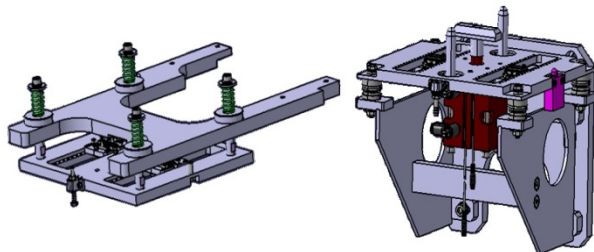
CAD drawings upper part (left) and lower part (right) of the media board including supports
